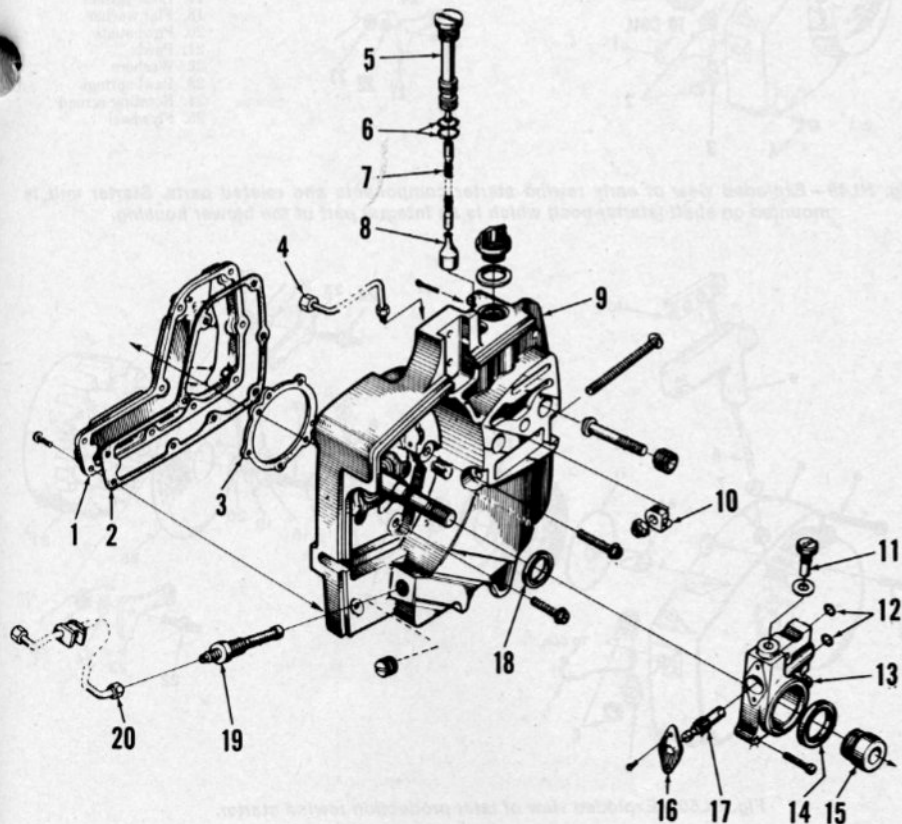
Exploded view of automatic chain oil pump on models so equipped.
